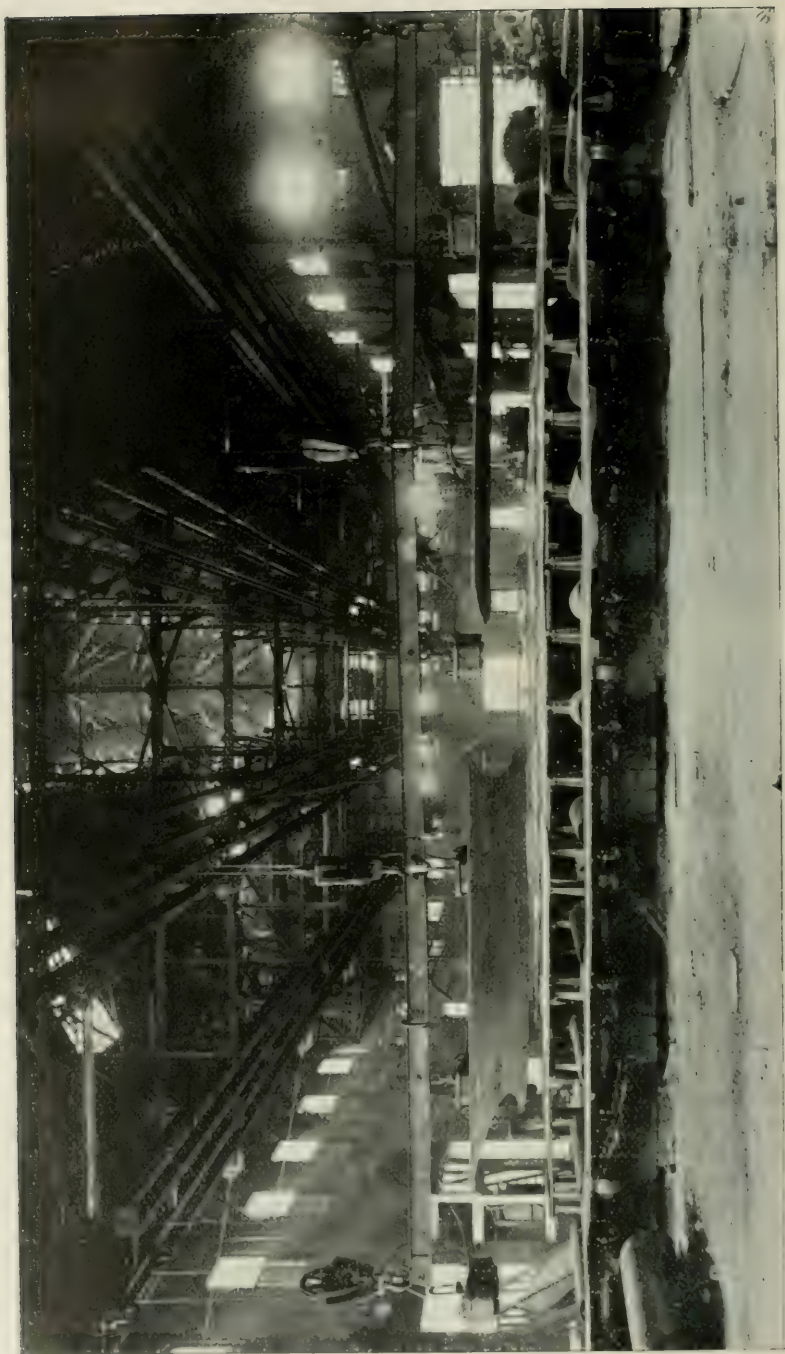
Plate Mill. Electro-Magnetic Conveyors taking a Plate from the Marking Platform to the Shears.
